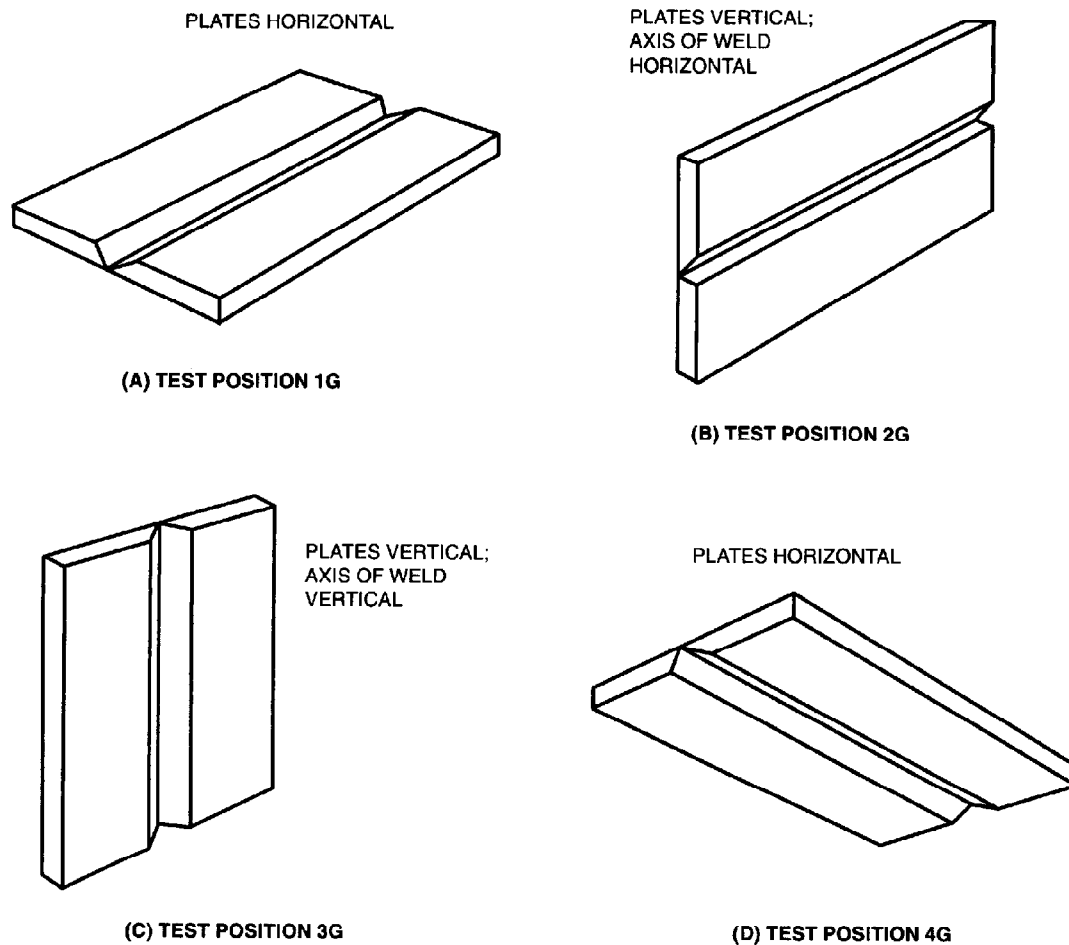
Positions of Test Plates for Groove Welds (see 4.2.4)
